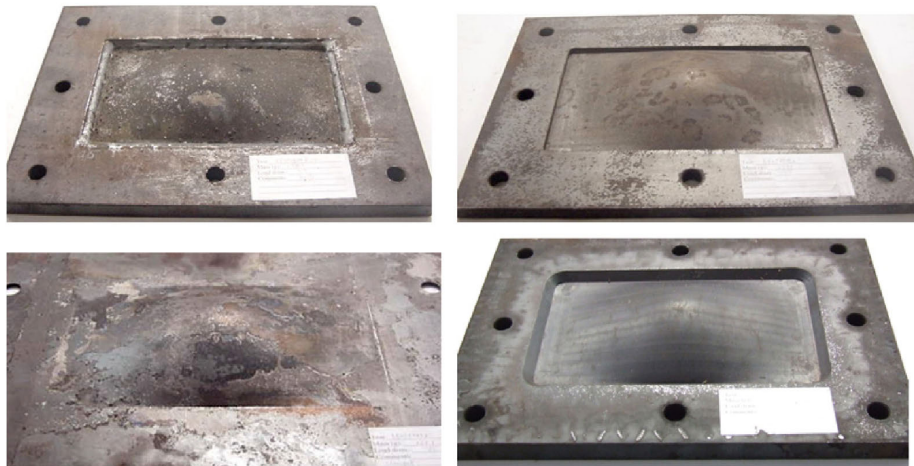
Photographs of the various boundary conditions. Top left proceeding clockwise: welded, straight machined, chamfer machined and clamped. [39]
